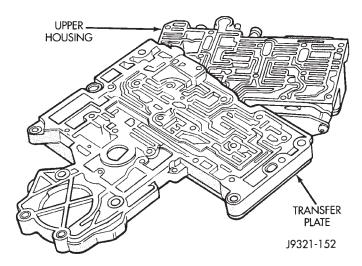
Removing Transfer Plate From Upper Housing-46RH
